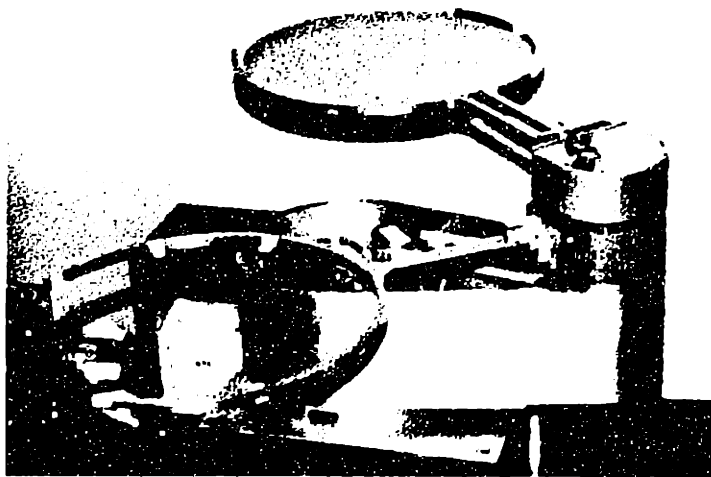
Prototype fork grippers and arm assembly in test fixture.
